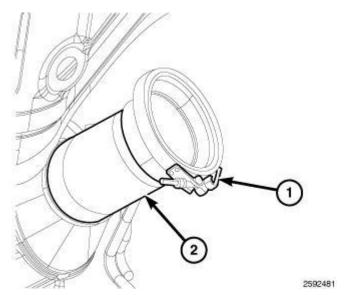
Turbocharger Exhaust Outlet V-Clamp Courtesy of CHRYSLER GROUP, LLC
